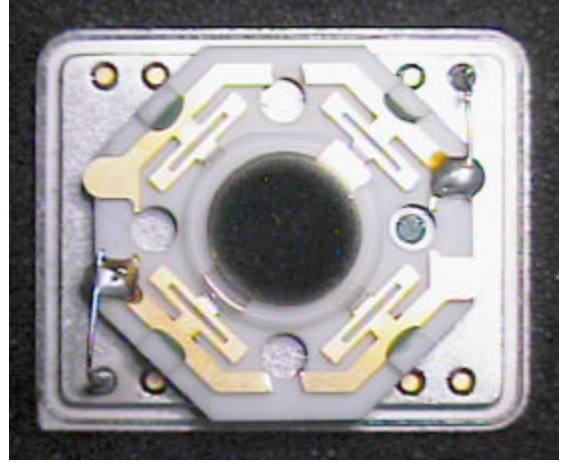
(10mm) Resistance Weld QRM Structure (flats).
